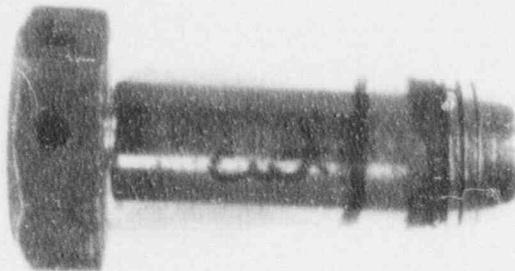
View of the overall appearance of bolt number 3, illustrating the rubbing and polishing of remaining bolt threads.
